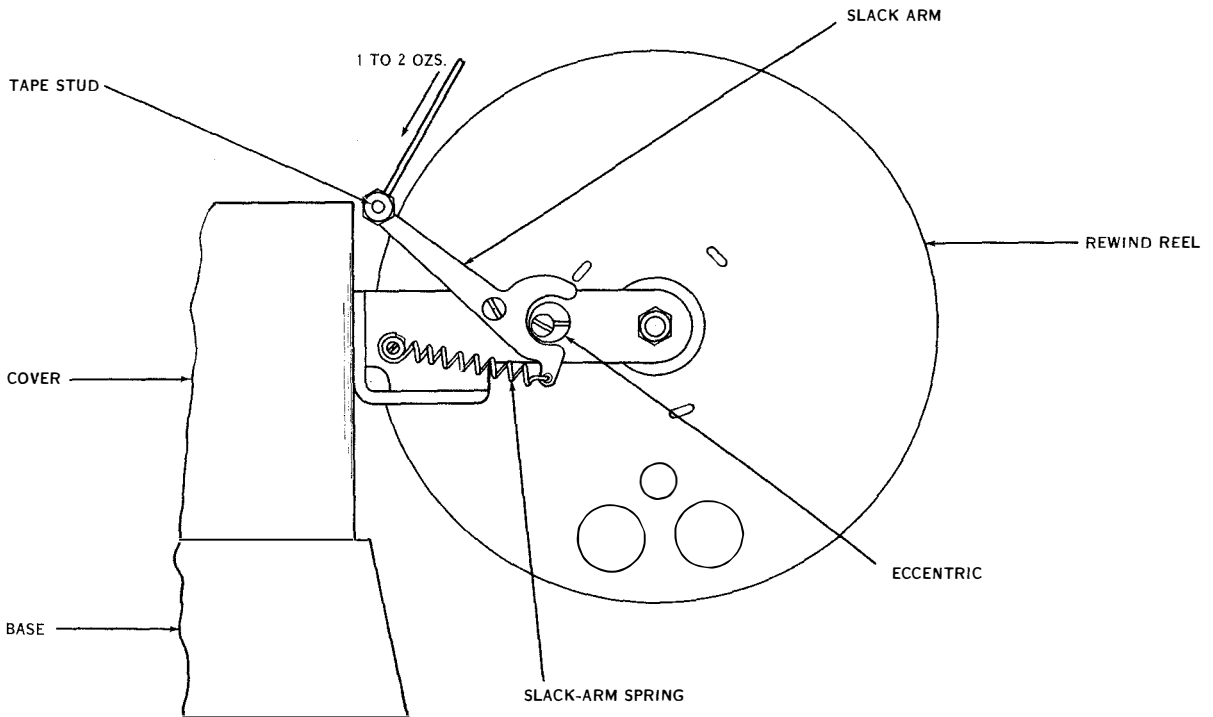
Rewind Reel Slack Arm Spring Tension
